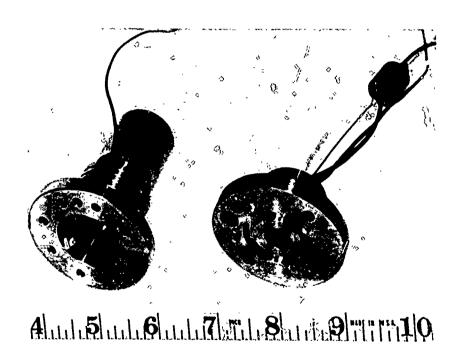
Cupro-nickel top end fitting (left) and top line termination (right) showing glass-to-metal seal
